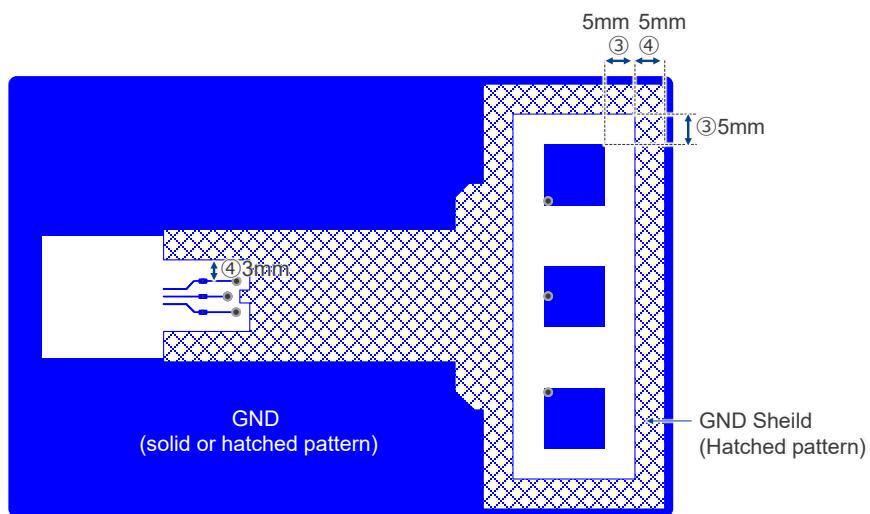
GND Shield Pattern Example for Multi-layer Board (top layer)
